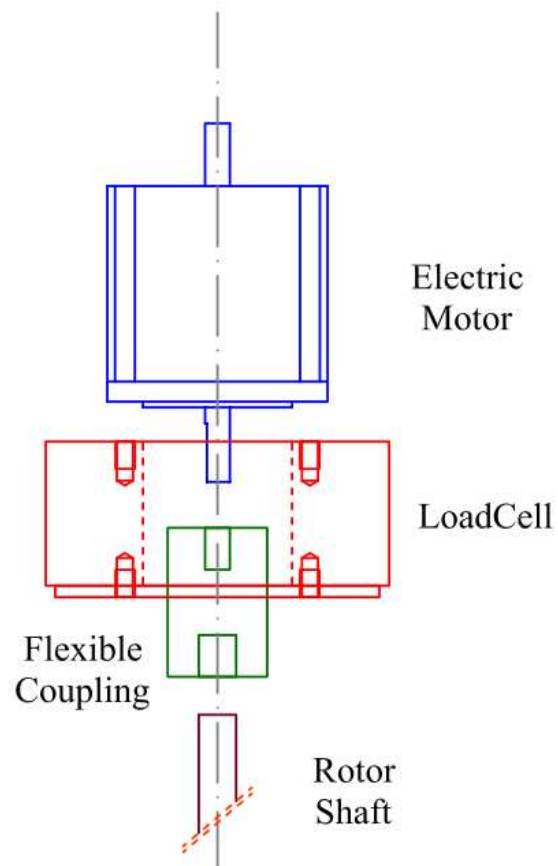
Exploded view of the connections between the electric motor, the load cell and the rotor shaft
